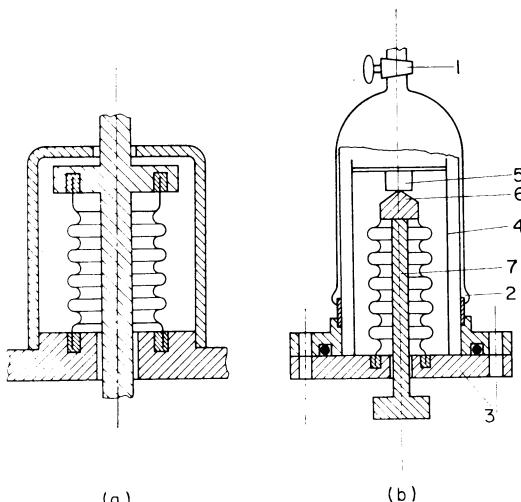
Bellows used to seal axial translation motion: (a) in a sealing system of a valve; (b) in a device to open under vacuum a sealed container (after Schacher¹¹⁰¹)
